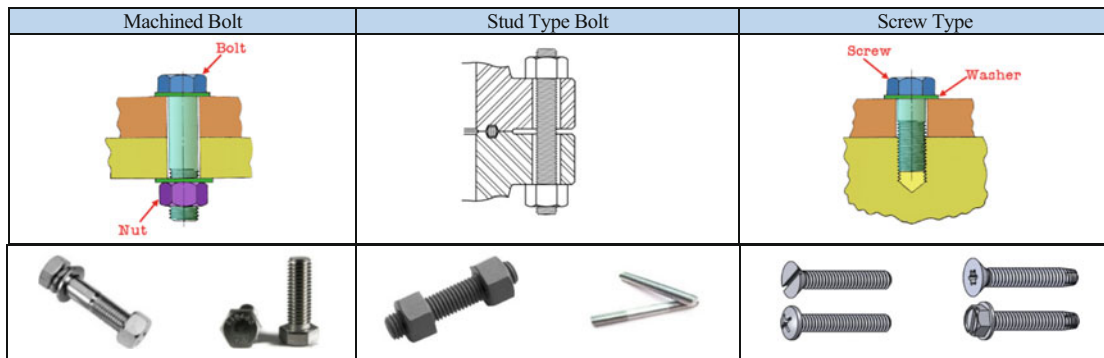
Type of bolting. (Source: ASME B1.xx)
